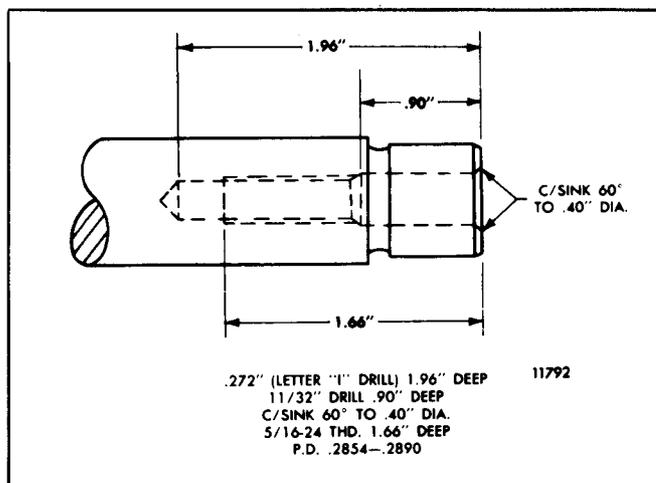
Dimensions for Reworking 6V Blower Rotor Shafts
